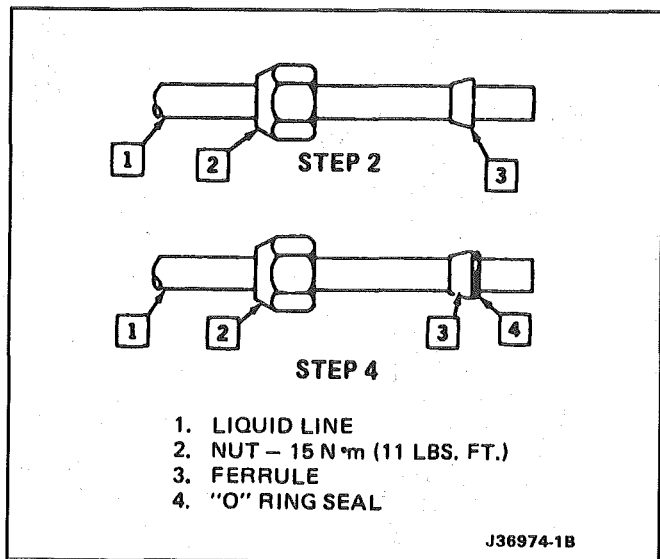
Liquid Line Filter Ferrule and "O" Ring Location
